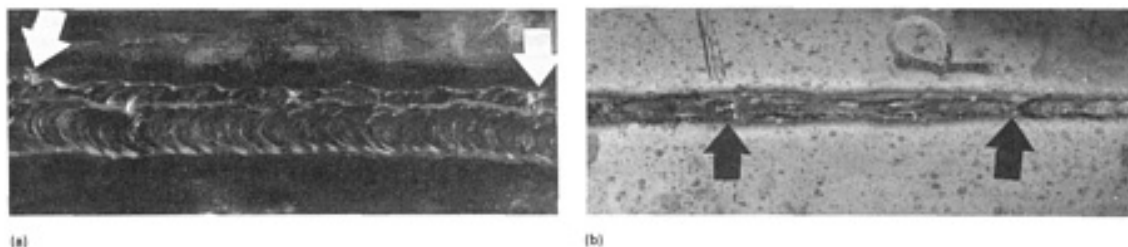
DEFECTS IN A MULTIPASS WELD MADE ON A 1.07 M (42 IN.) DIAMETER X-65 STEEL PIPE. (A) EXTERIOR VIEW SHOWING LACK OF UNIFORMITY (RIGHT ARROW) AND UNDERCUT (LEFT ARROW). (B) INTERIOR VIEW SHOWING LACK OF PENETRATION (RIGHT ARROW) AND BURN-THROUGH (LEFT ARROW)
